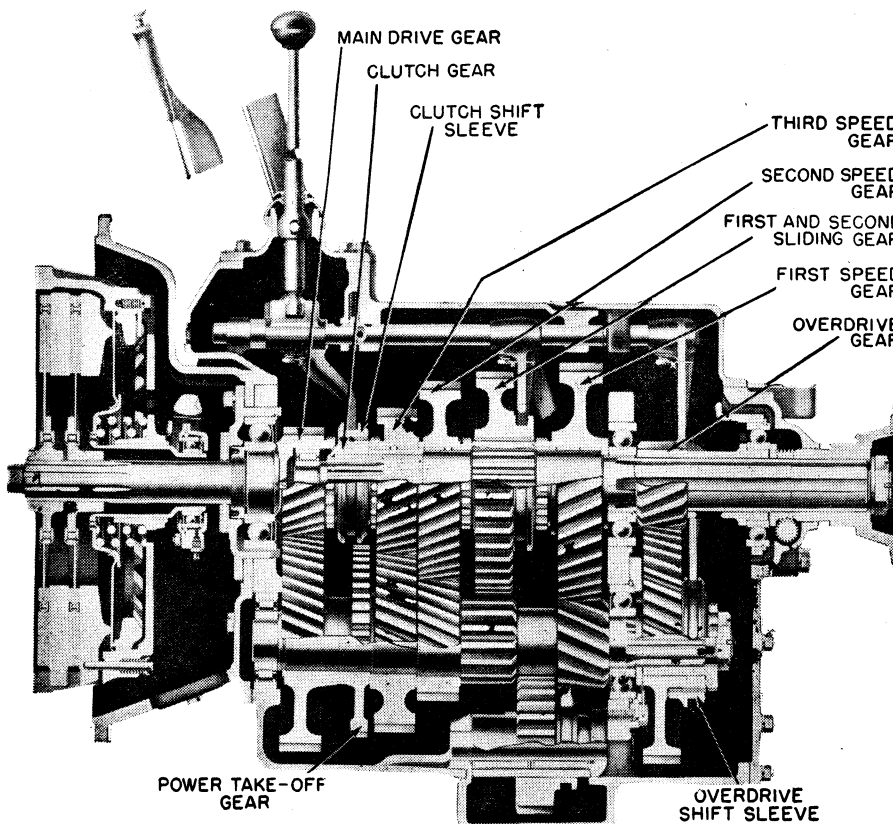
Spicer five speed transmission. Models 8051, 8251, 8055, 8255 (Models 8055 and 8255 have double row ball bearing at rear of mainshaft)
